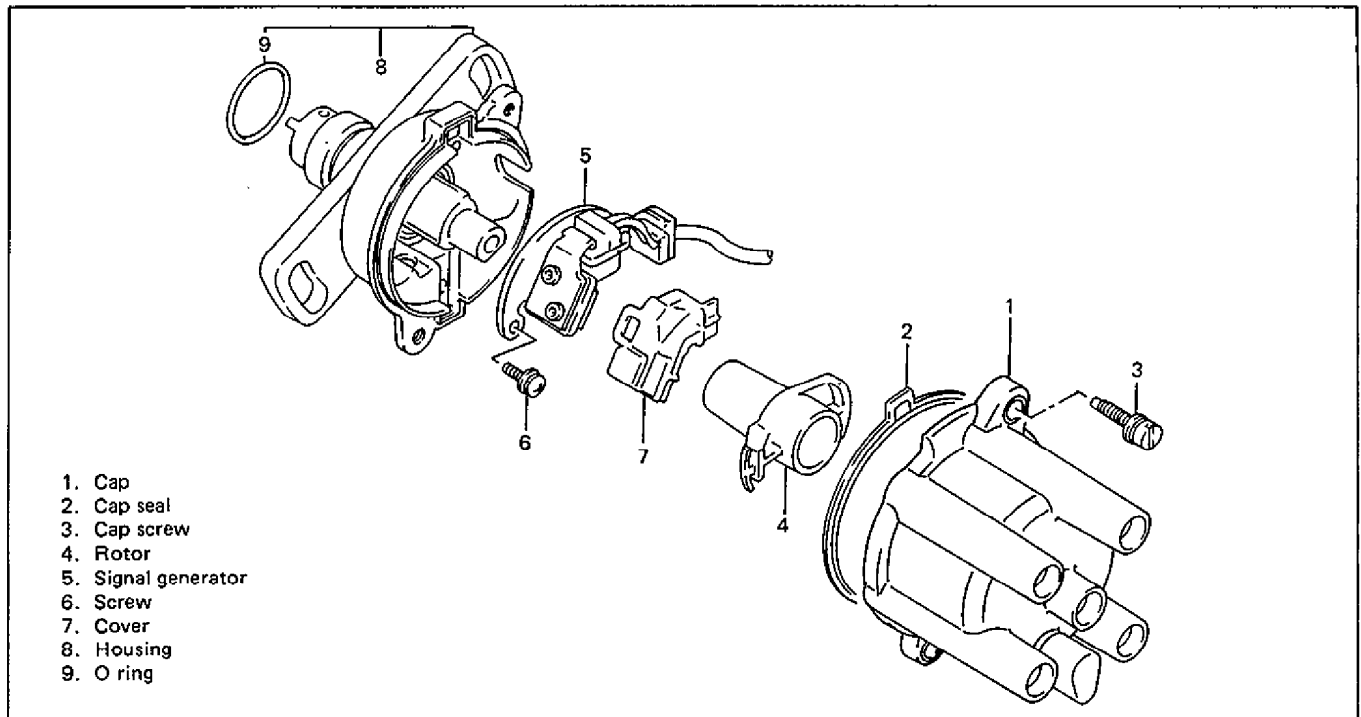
F-20 Distributor Components for ESA Type Ignition System
